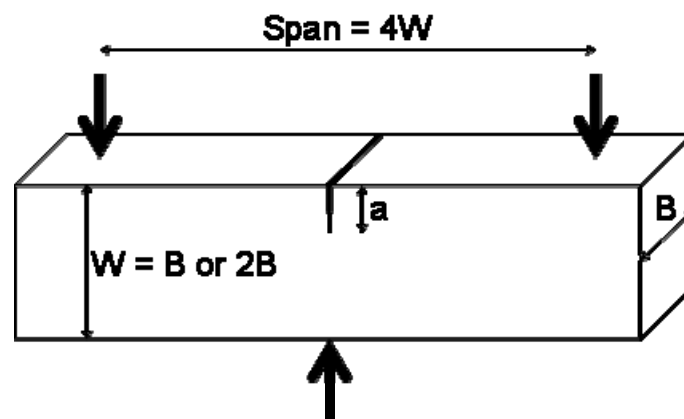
Single edge notched bend specimen geometry (loaded in three point bending).
